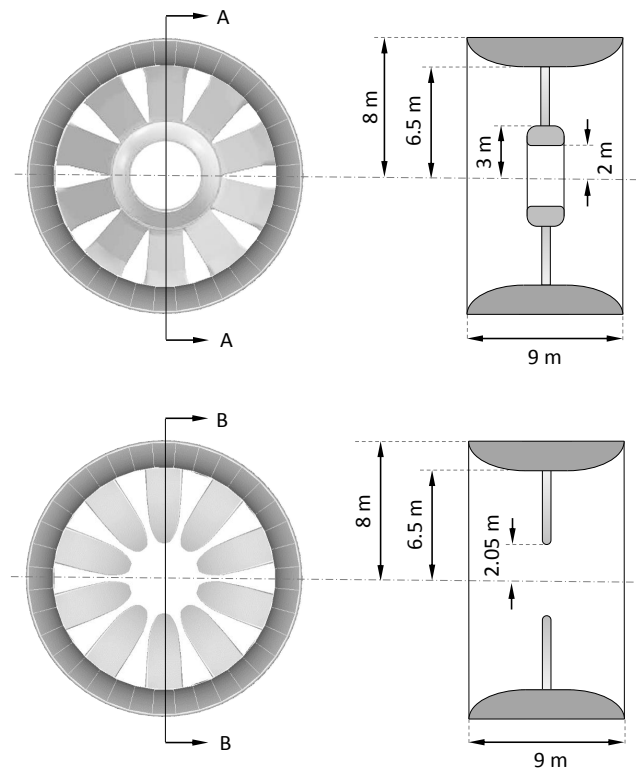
Overall turbine rotor and stator dimensions for the OpenHydro OCT16 (top) and PS2 (bottom) devices, showing turbine sub-assembly (support structure / foundation removed) frontal (left) and sectional views (right)
